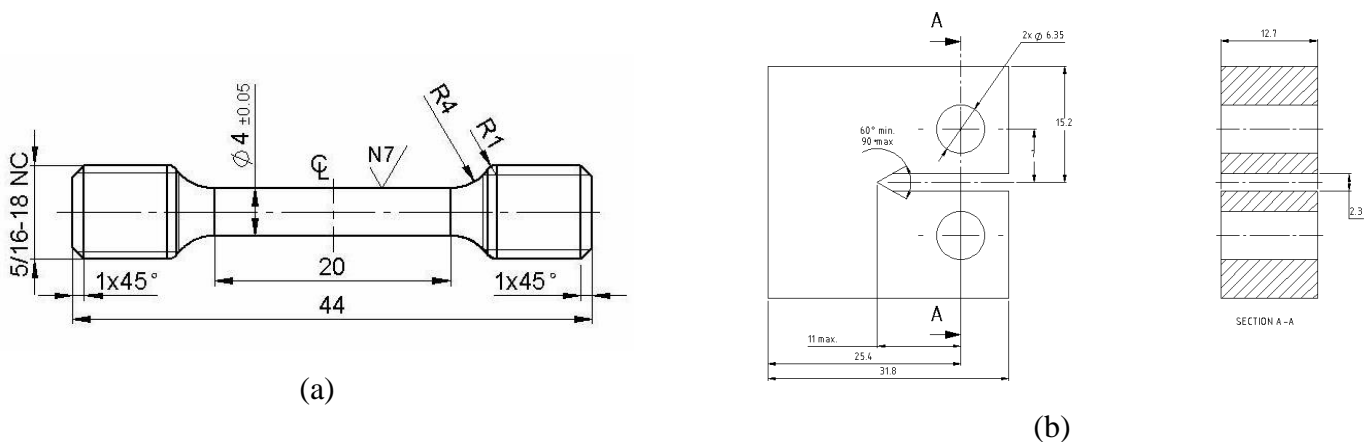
(a) ASTM E8 tensile specimen's geometry and dimensions. (B) ASTM E399-17 CT specimen's geometry and dimensions.
